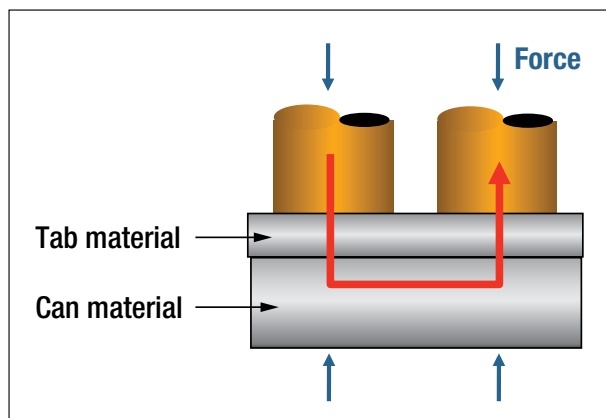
Resistance welding principle. Parallel electrode configuration.
